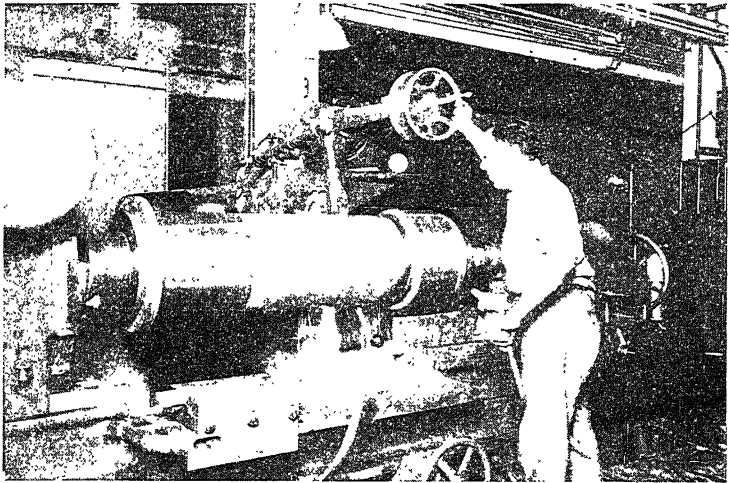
Finishing a cylindrical surface in a 28- by 120-in. hydraulic drive grinding machine. (*Courtesy of Landis Tool Company.*)
